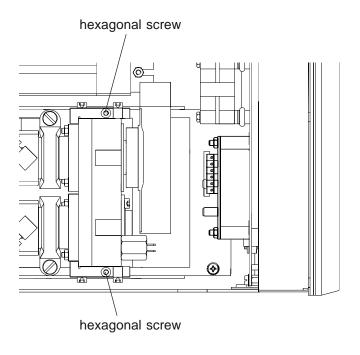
Photometer Assembly, example (Top view, detail)
